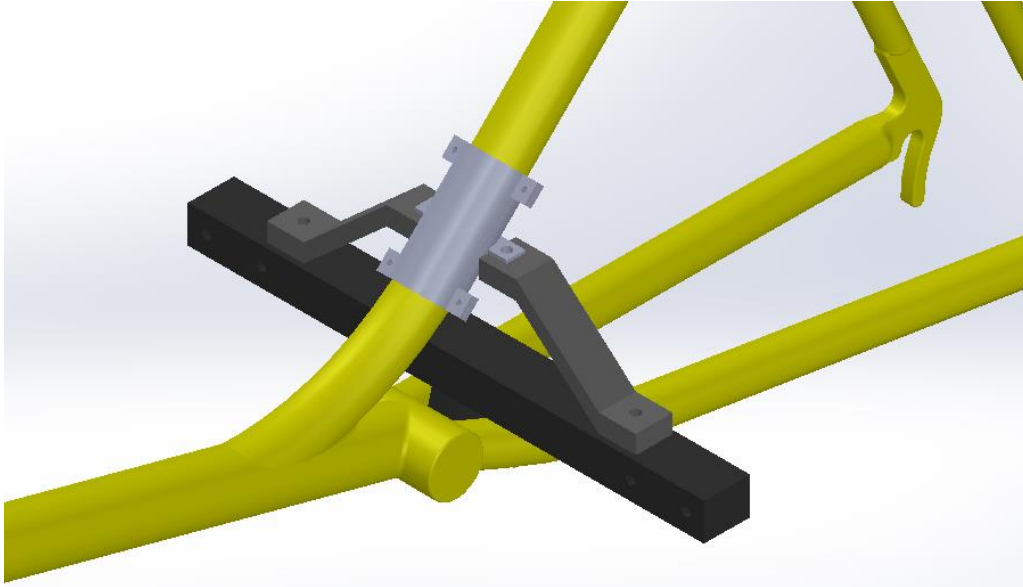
Isometric Assembly View of Clamshell Top Connection Concept
